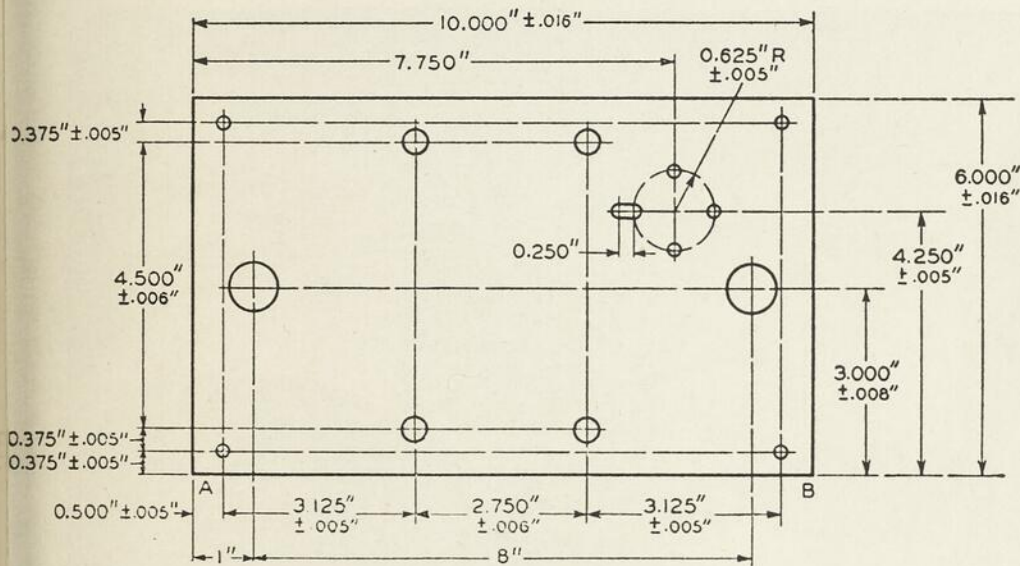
Flat plate of Fig. 5 functionally dimensioned from outside edges with tolerances
